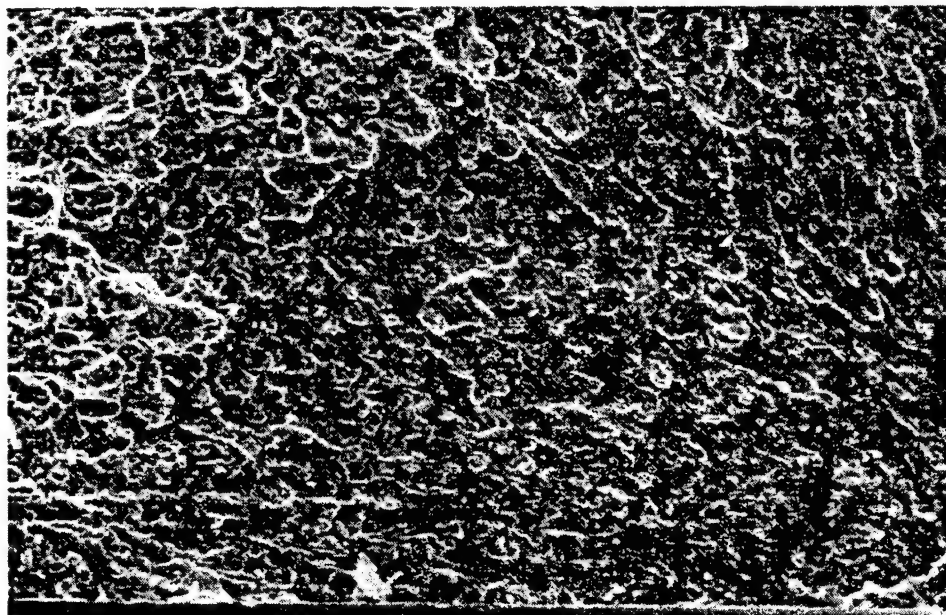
FRACTURE SURFACE APPEARANCE OF BARE 2024-T3 FATIGUE SPECIMENS TESTED IN VACUUM.
